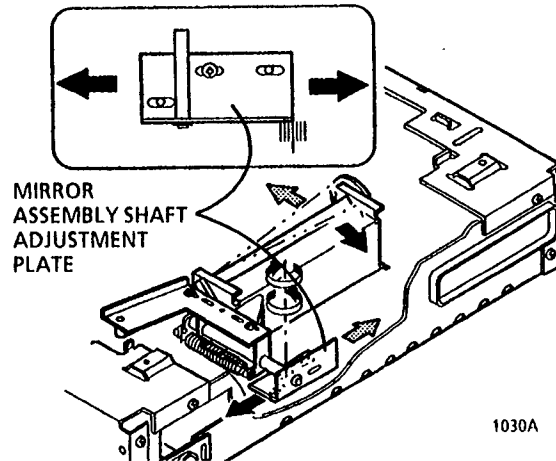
Centering The Mirror Assembly Shaft Adjustment Plate
